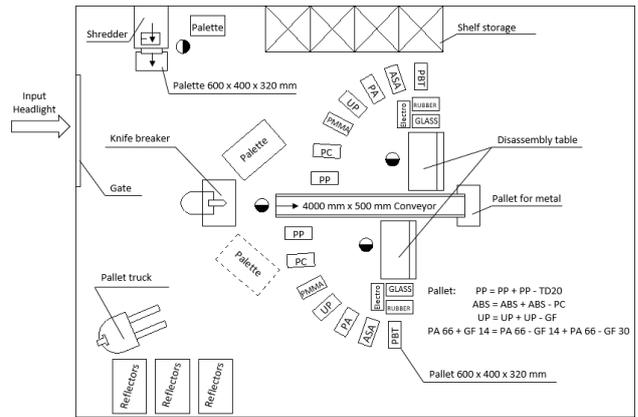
A dispositional layout (2D - view) of the destructive dismantling
